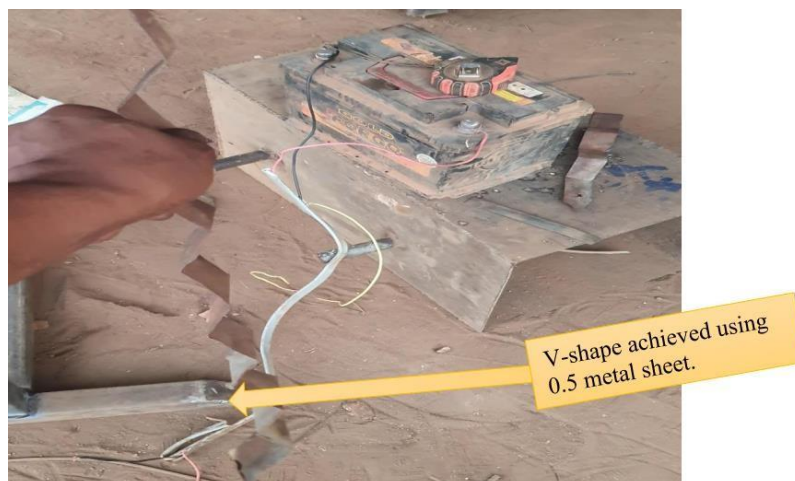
The V-shaped Obtained from the Automated Metal Sheet Bending Machine
